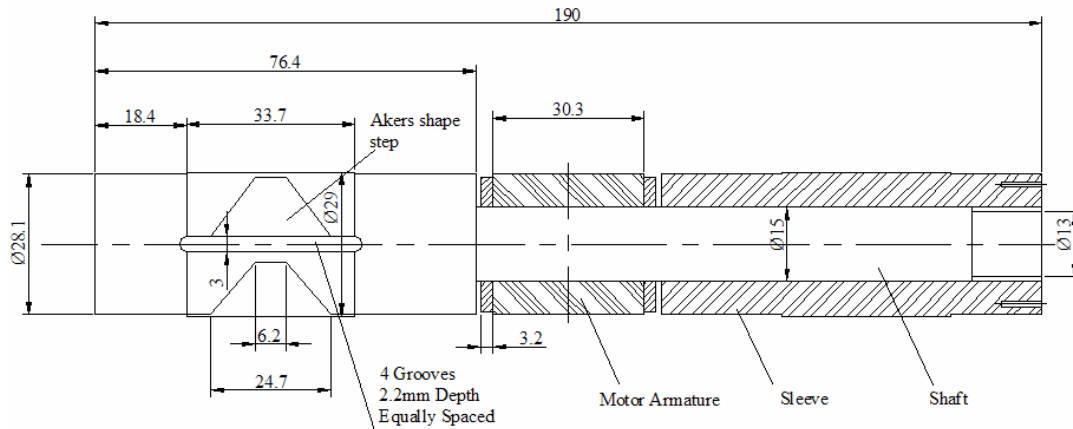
displays the assembly geometry of the test rotor. The rotor, weighing 0.87 kg, consists of a 4140 steel shaft with a diameter of 15 mm and 190 mm in length. The motor armature is located in the middle of the rotor assembly. Residual magnetism of the rotor is reduced to its lowest level possible to ensure even rotation, i.e., without intermittent starts/stops and high frequency chattering. Two cylindrical steel sleeves with NFC (Near-Frictionless Carbon) coating are fit onto the shaft. Elementary Akers shaped Rayleigh steps are etched by recessing the surface of the shaft below the original cylindrical surface. Figure 3 also shows two Akers shapes on the rotor surface. Four axial grooves separate the Rayleigh steps. The grooves are 3 mm wide and 2.2 mm deep.
